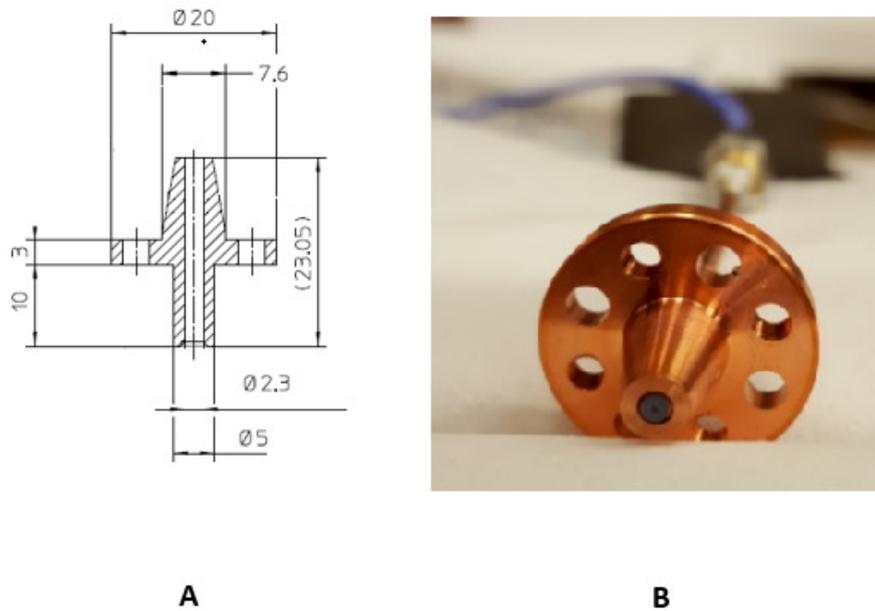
A: Plug dimensions in millimetres. B: An antenna in its plug ready to be inserted into the resonator.
